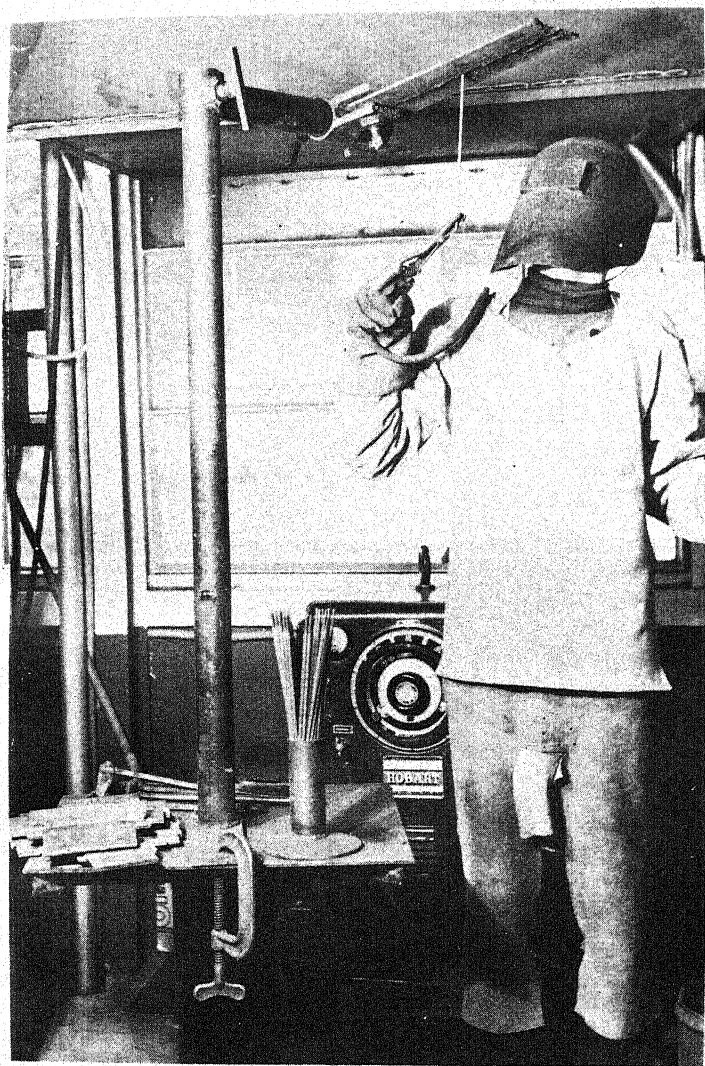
Metalsmith properly clothed for arc-welding.
